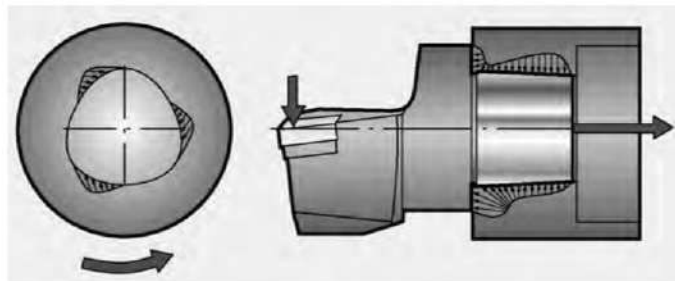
Clamping system used in the Seco Capto® Modular Tooling used for Turning Tools (Courtesy, Seco Tools, Sweden)
